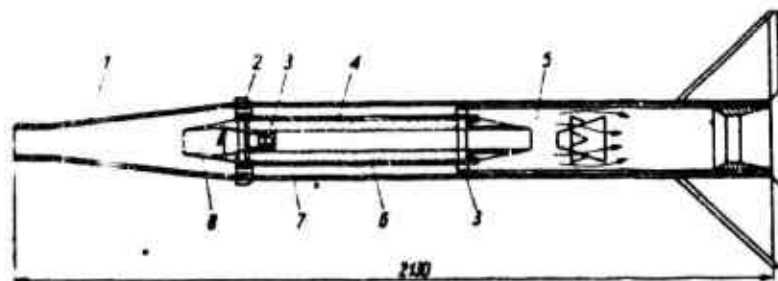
Solid fuel ramjet engine: 1) diffuser; 2) seal; 3) igniter; 4) fuel grain made of compressed magnesium powder; 5) mixing chamber of secondary air and combustion products; 6) fuel grain frame; 7) secondary air channel; 8) primary air channel.
